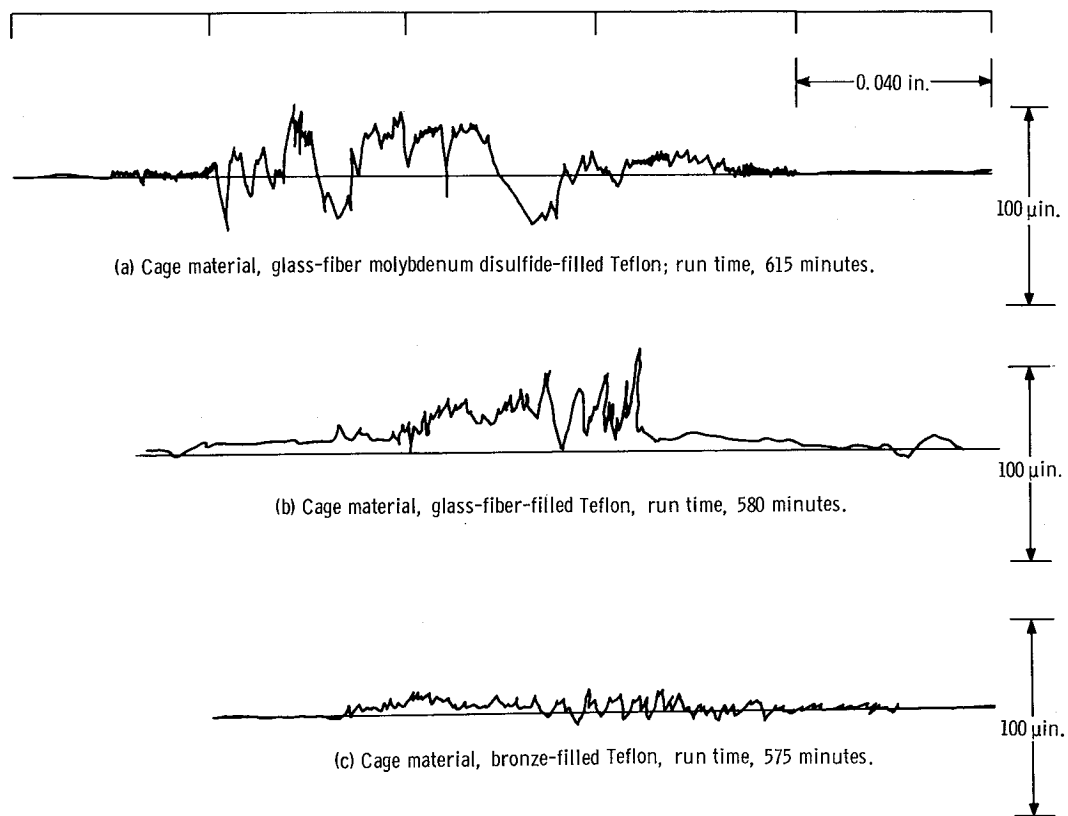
Profile traces of inner-race grooves for bearings run with filled-Teflon cage materials. Shaft speed, 20 000 rpm; thrust load, 200 pounds; coolant, hydrogen gas at 60° R.
